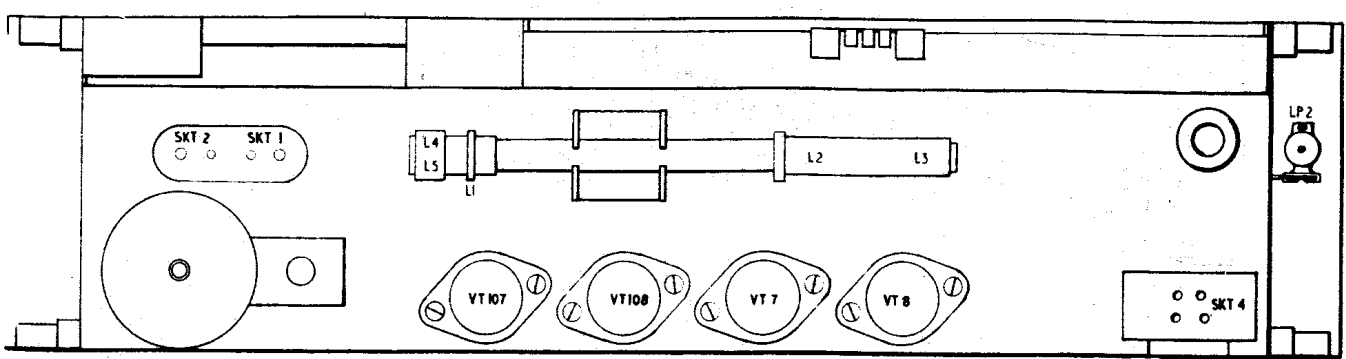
LAYOUT OF RECEIVER PRINT PANEL
